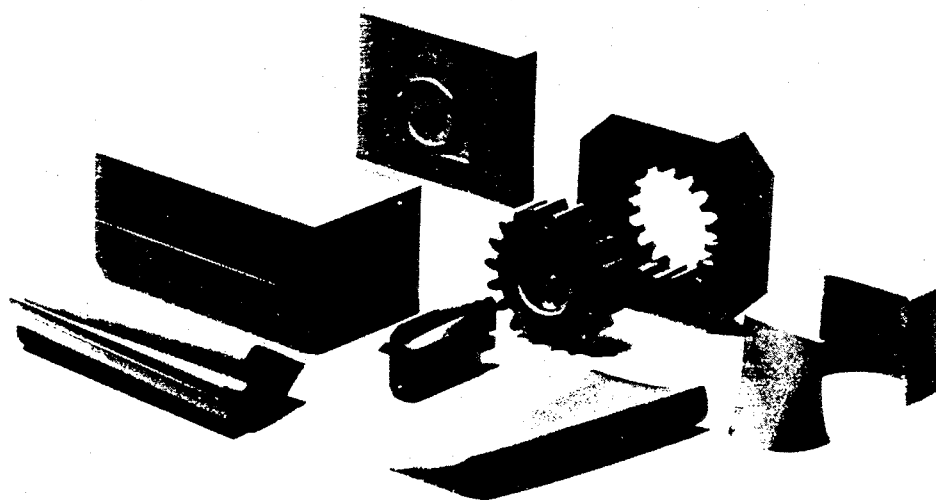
EDM Machining of ceramic pressing dies, casting moulds, and wear parts.
